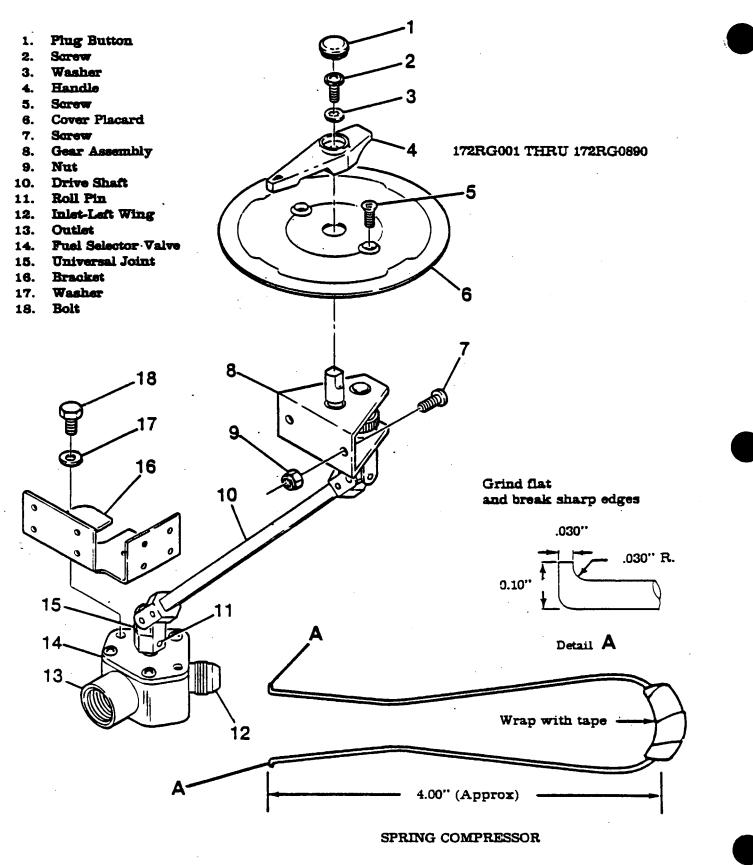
Fuel Selector Valve and Spring Compressor (Sheet 1 of 4)
